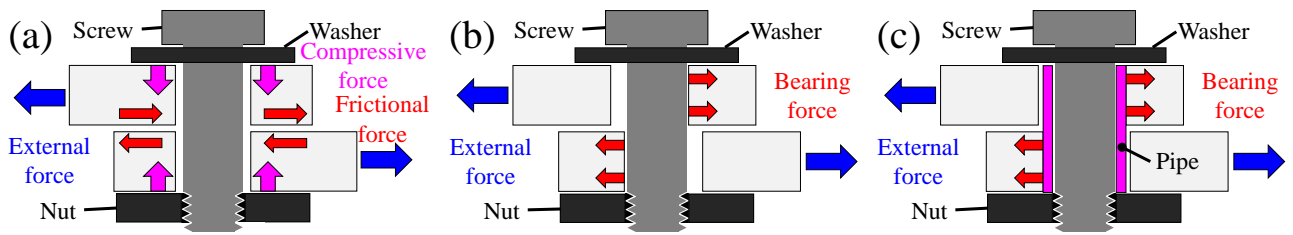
Fastening method using screws: (a) Friction joint, (b) Bearing joint, (c) Bearing joint using thin-walled cylindrical parts.
